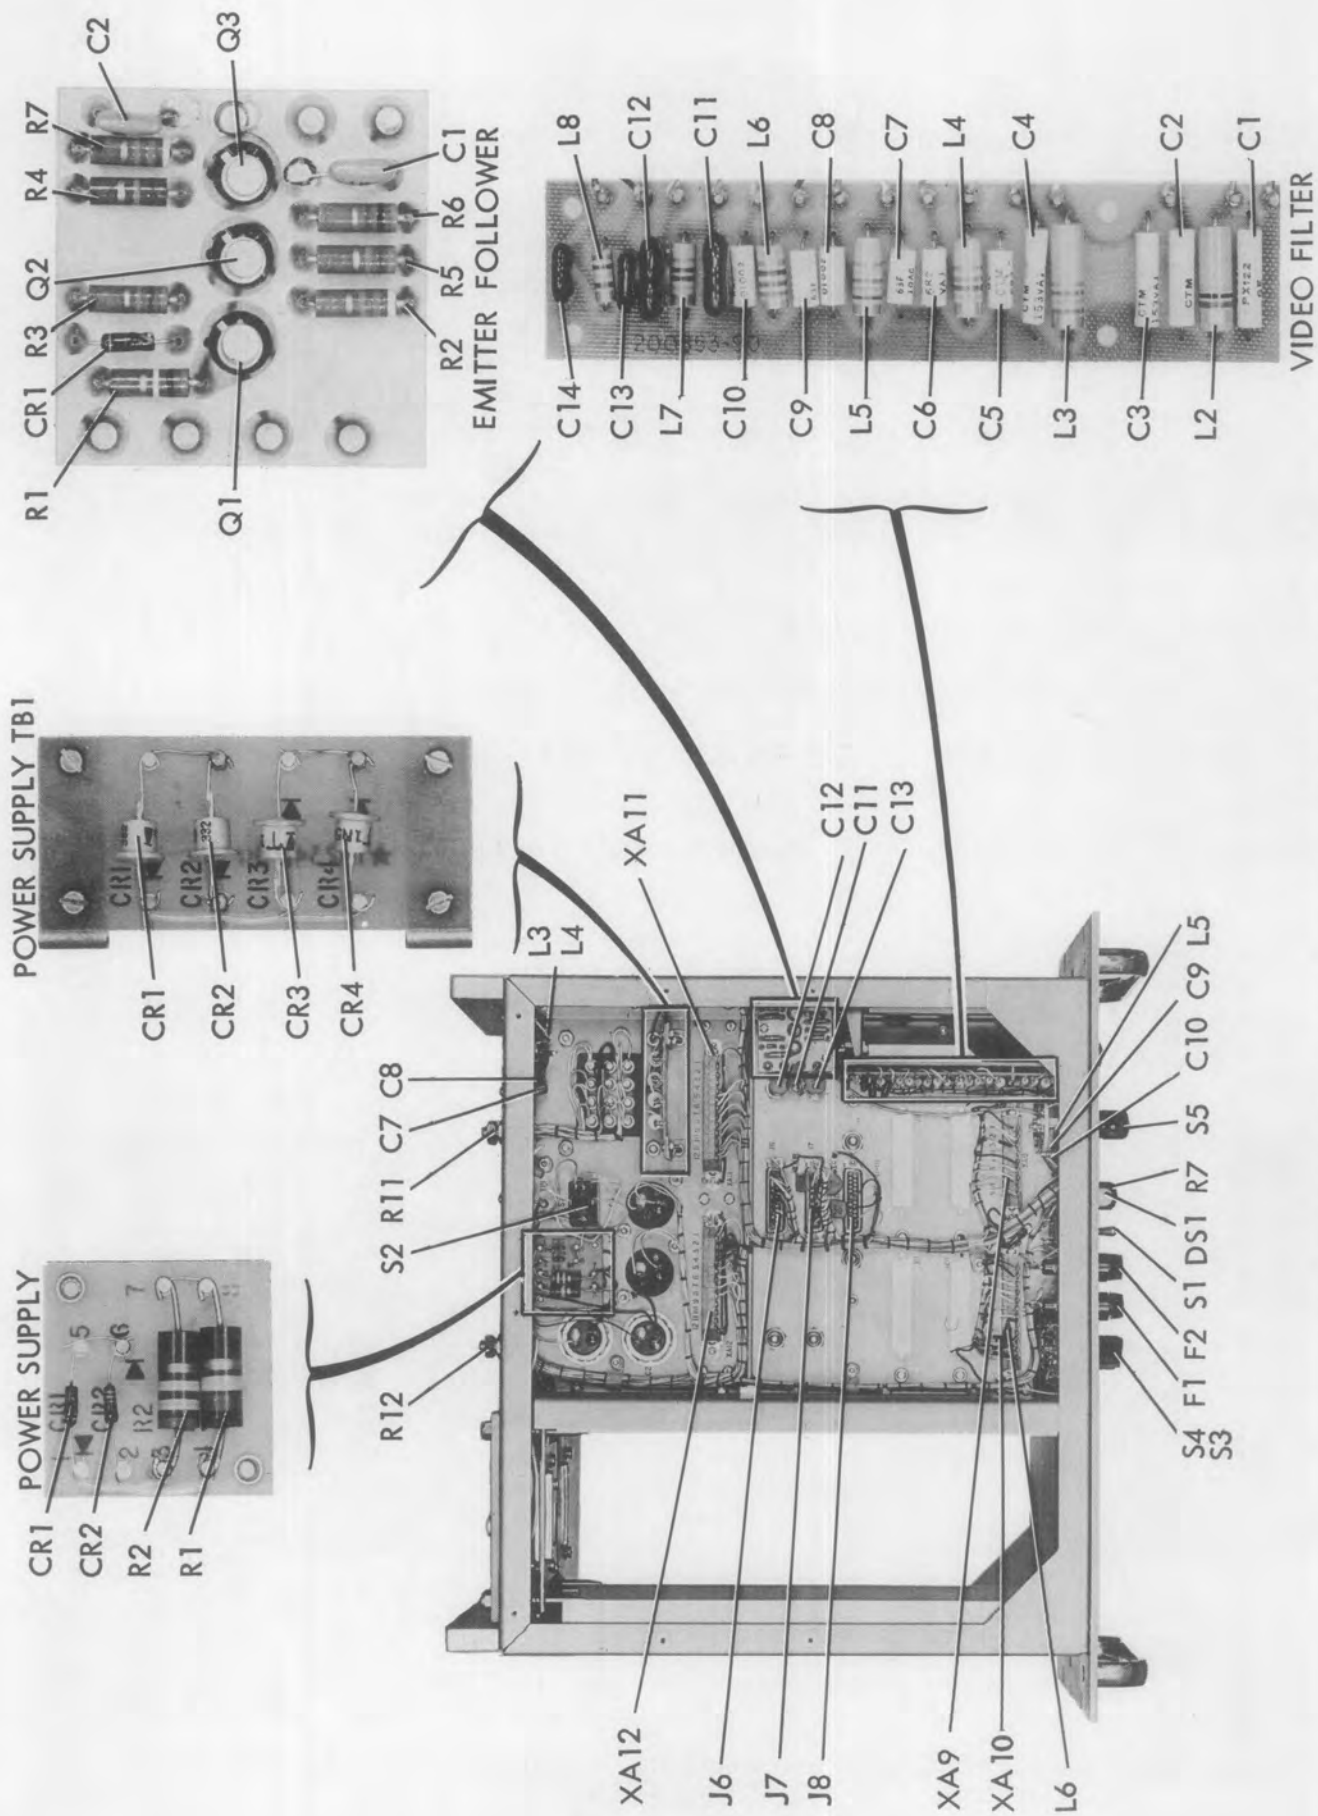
R-1037A Receiver Main Chassis, Bottom View
